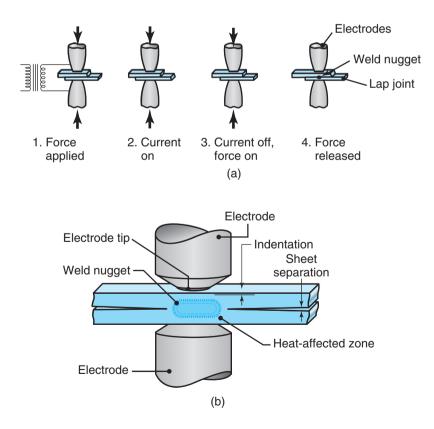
(a) Sequence of events in resistance spot welding of a lap joint. (b) Cross-section of a spot weld, showing the weld nugget and the indentation of the electrode on sheet surfaces. This is one of the most commonly used processes in sheet-metal fabrication and in automotive metal-body assembly.
